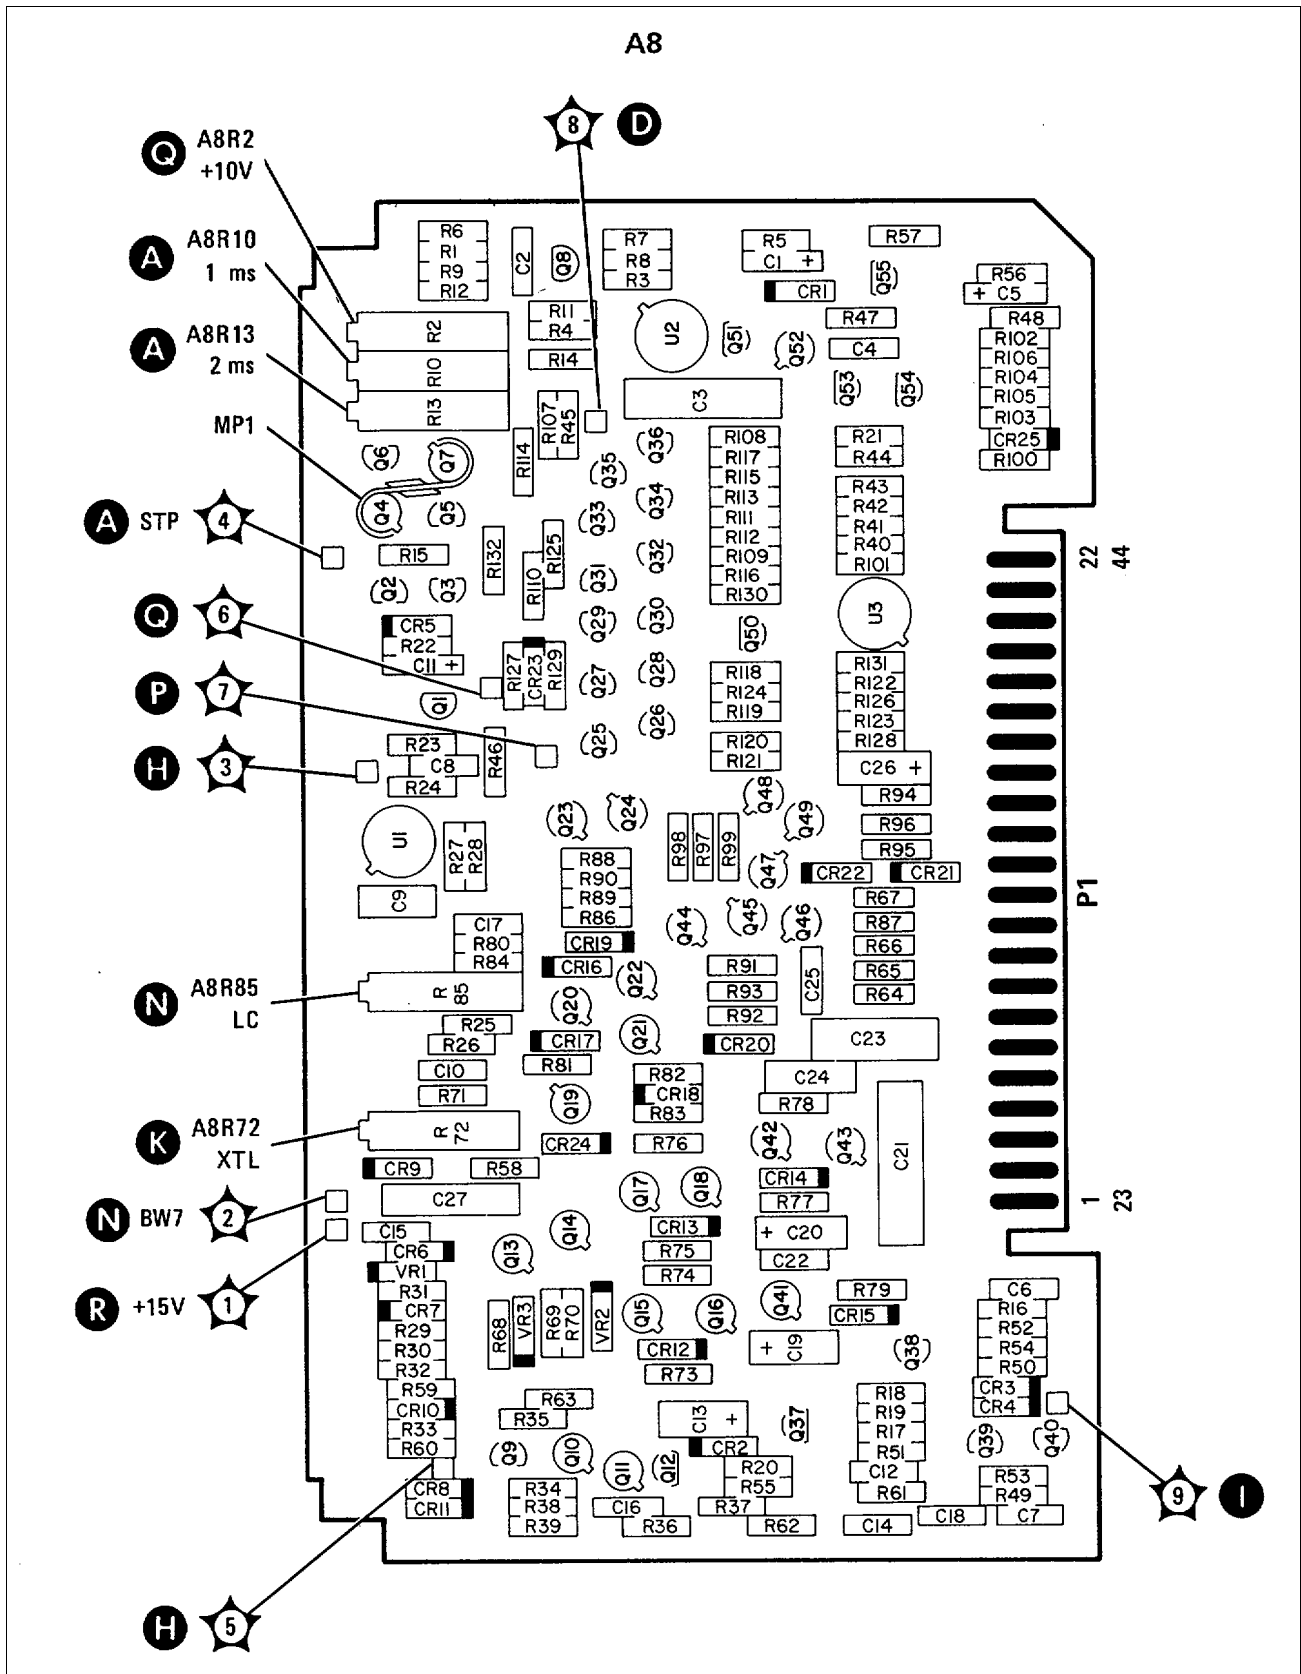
A8 Sweep Generator Assembly, Component and Test Point Locations
